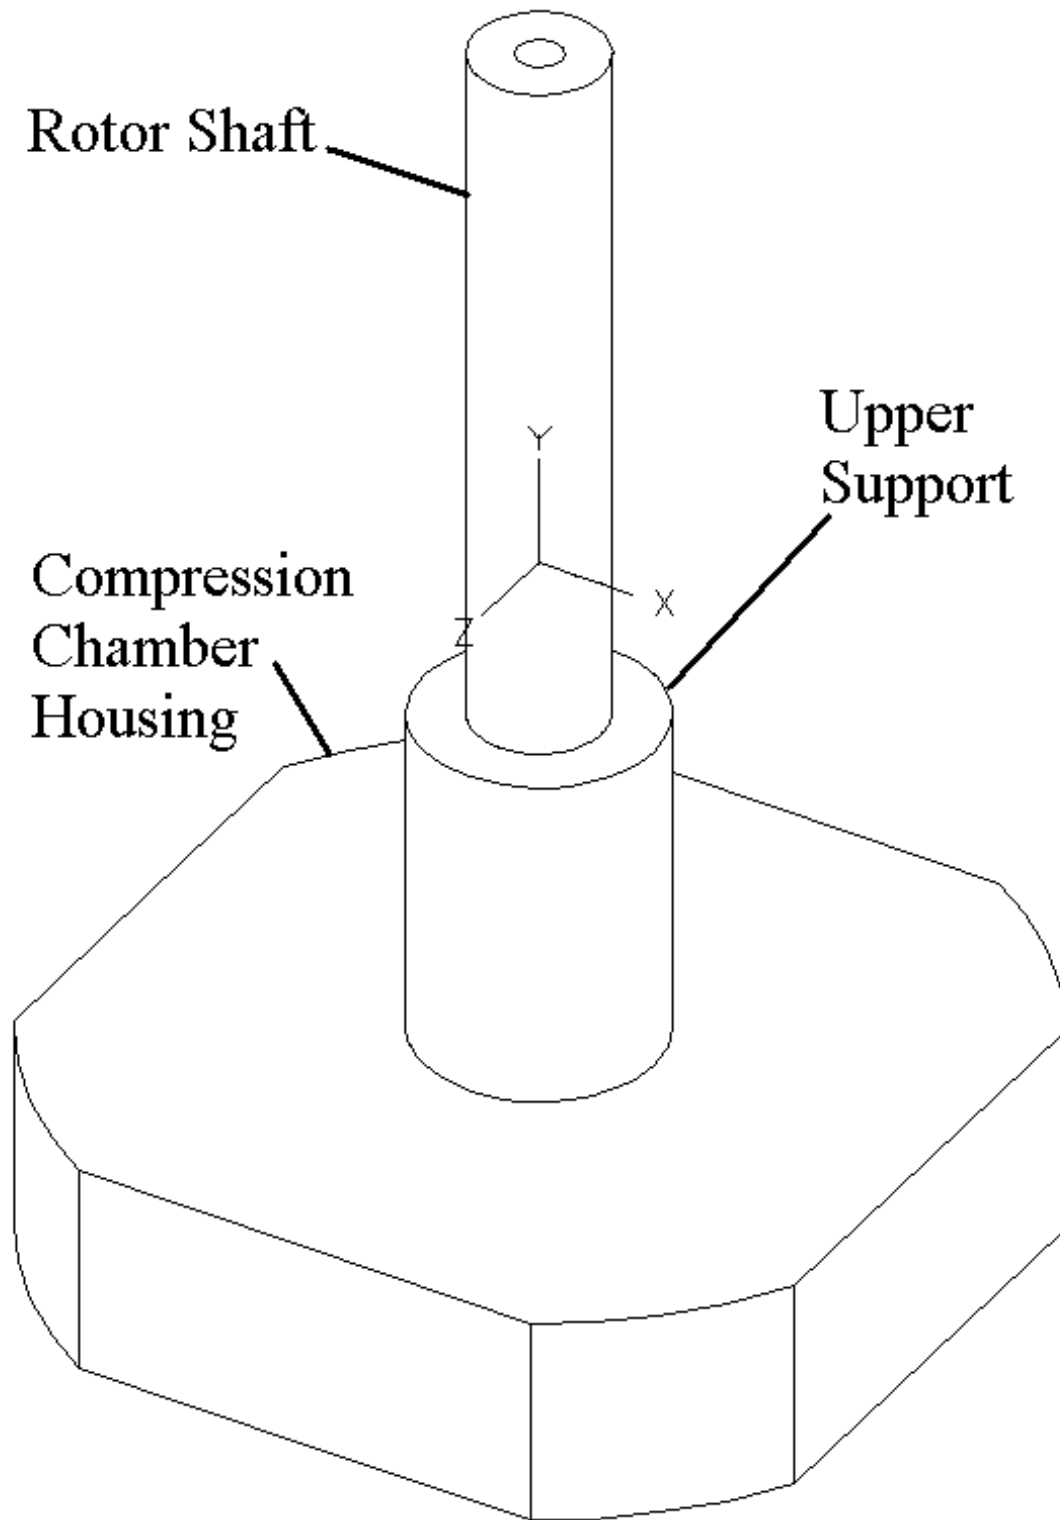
Isometric view of the compression chamber, upper support and rotor shaft
